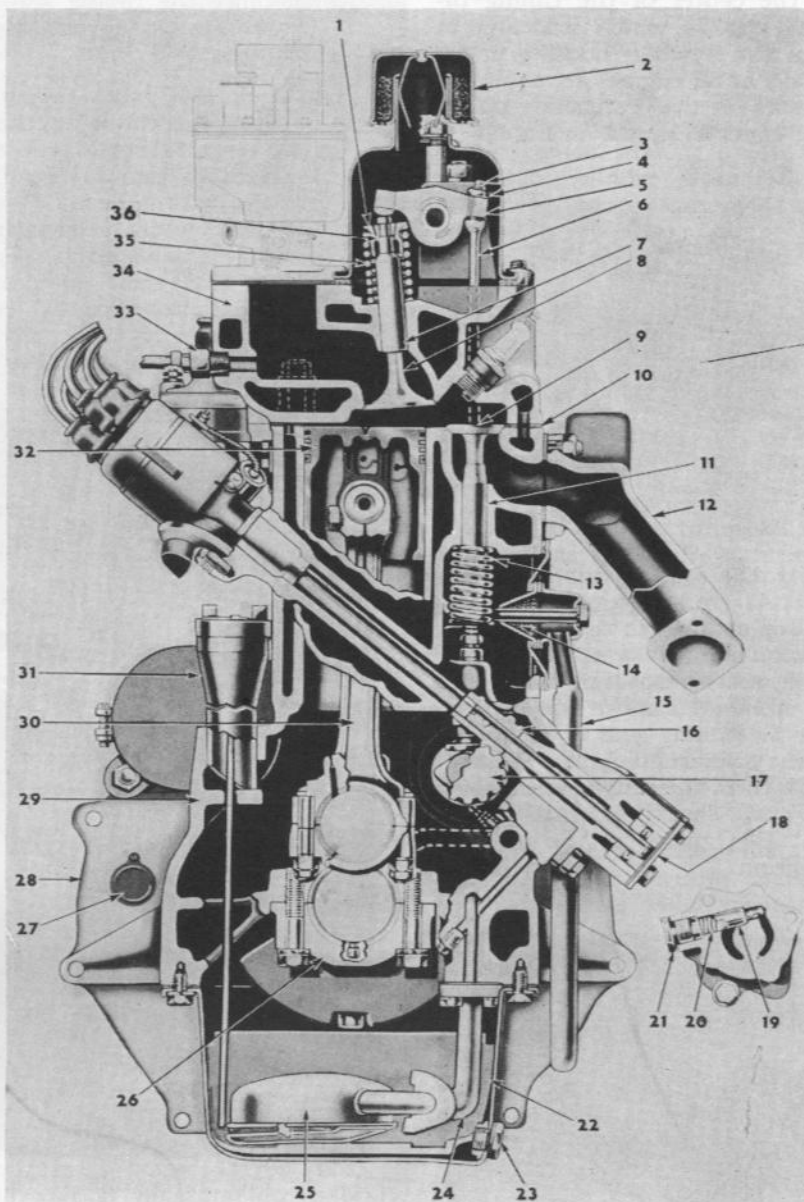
FOUR CYLINDER F-HEAD ENGINE—END VIEW
